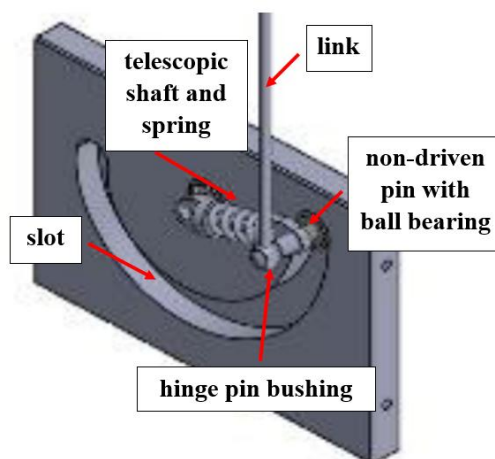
A detail of the slot and of the part of mechanism used to guide the finger.
